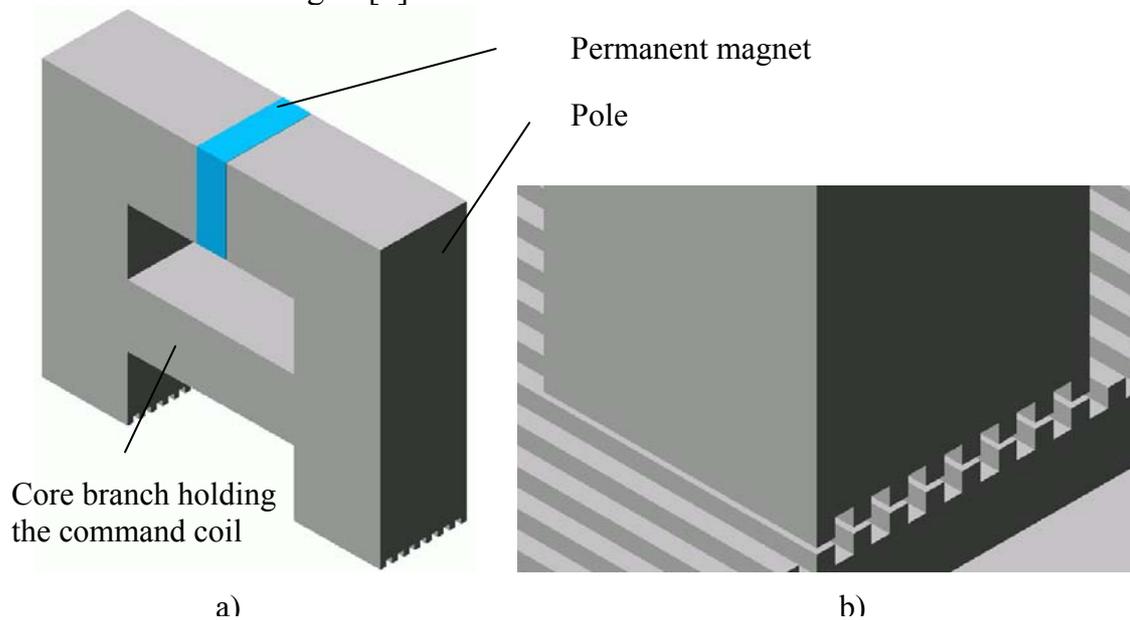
The iron core of the mover: a) whole structure; b) toothed part.
